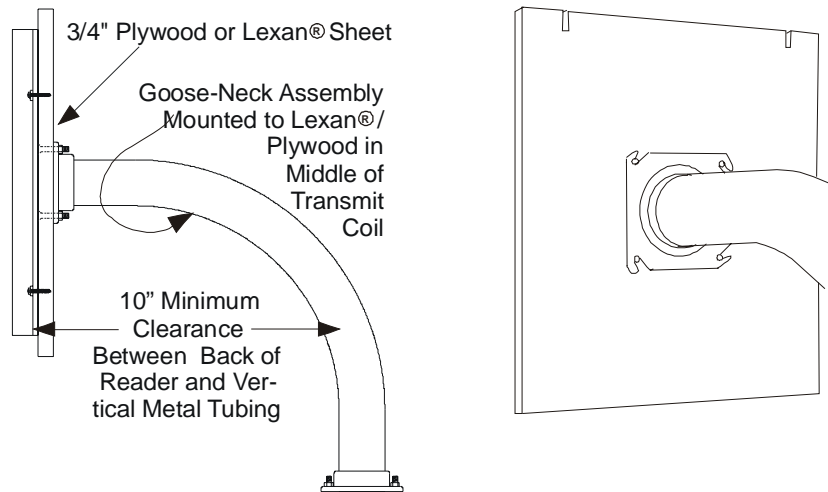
4220 Pedestal-Mounting (Side & Back Views)
